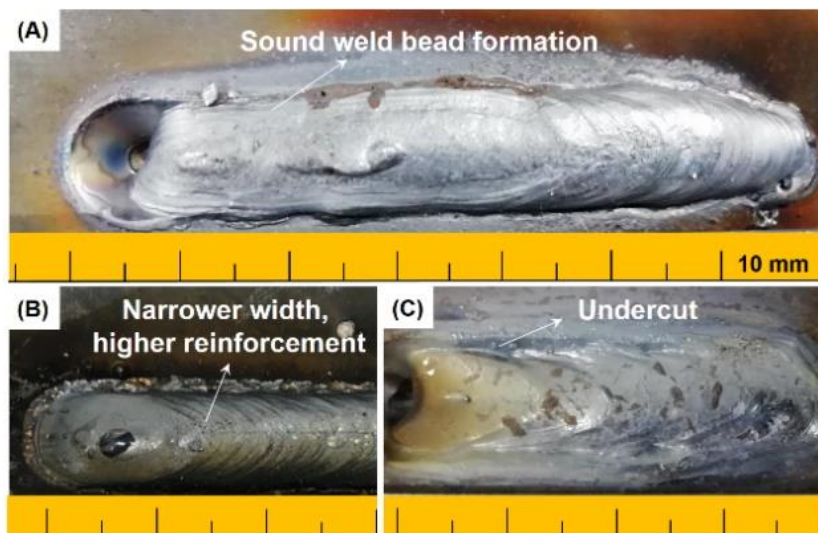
The weld bead formation: (A) Hybrid KPAW-P-GMAW; (B) P-GMAW; (C) KPAW
